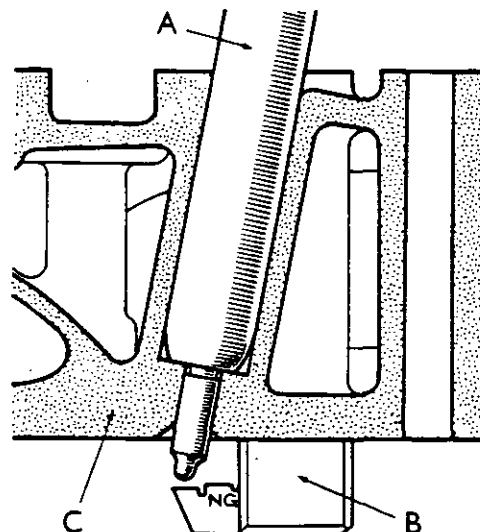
CHECKING CYLINDER HEAD BEFORE REFACING
